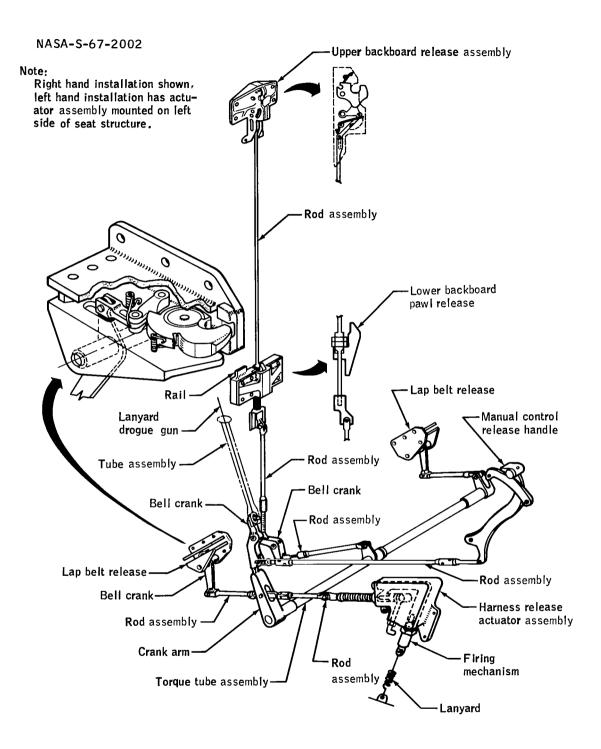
Mechanical-linkage and release-installation integrated harness.
